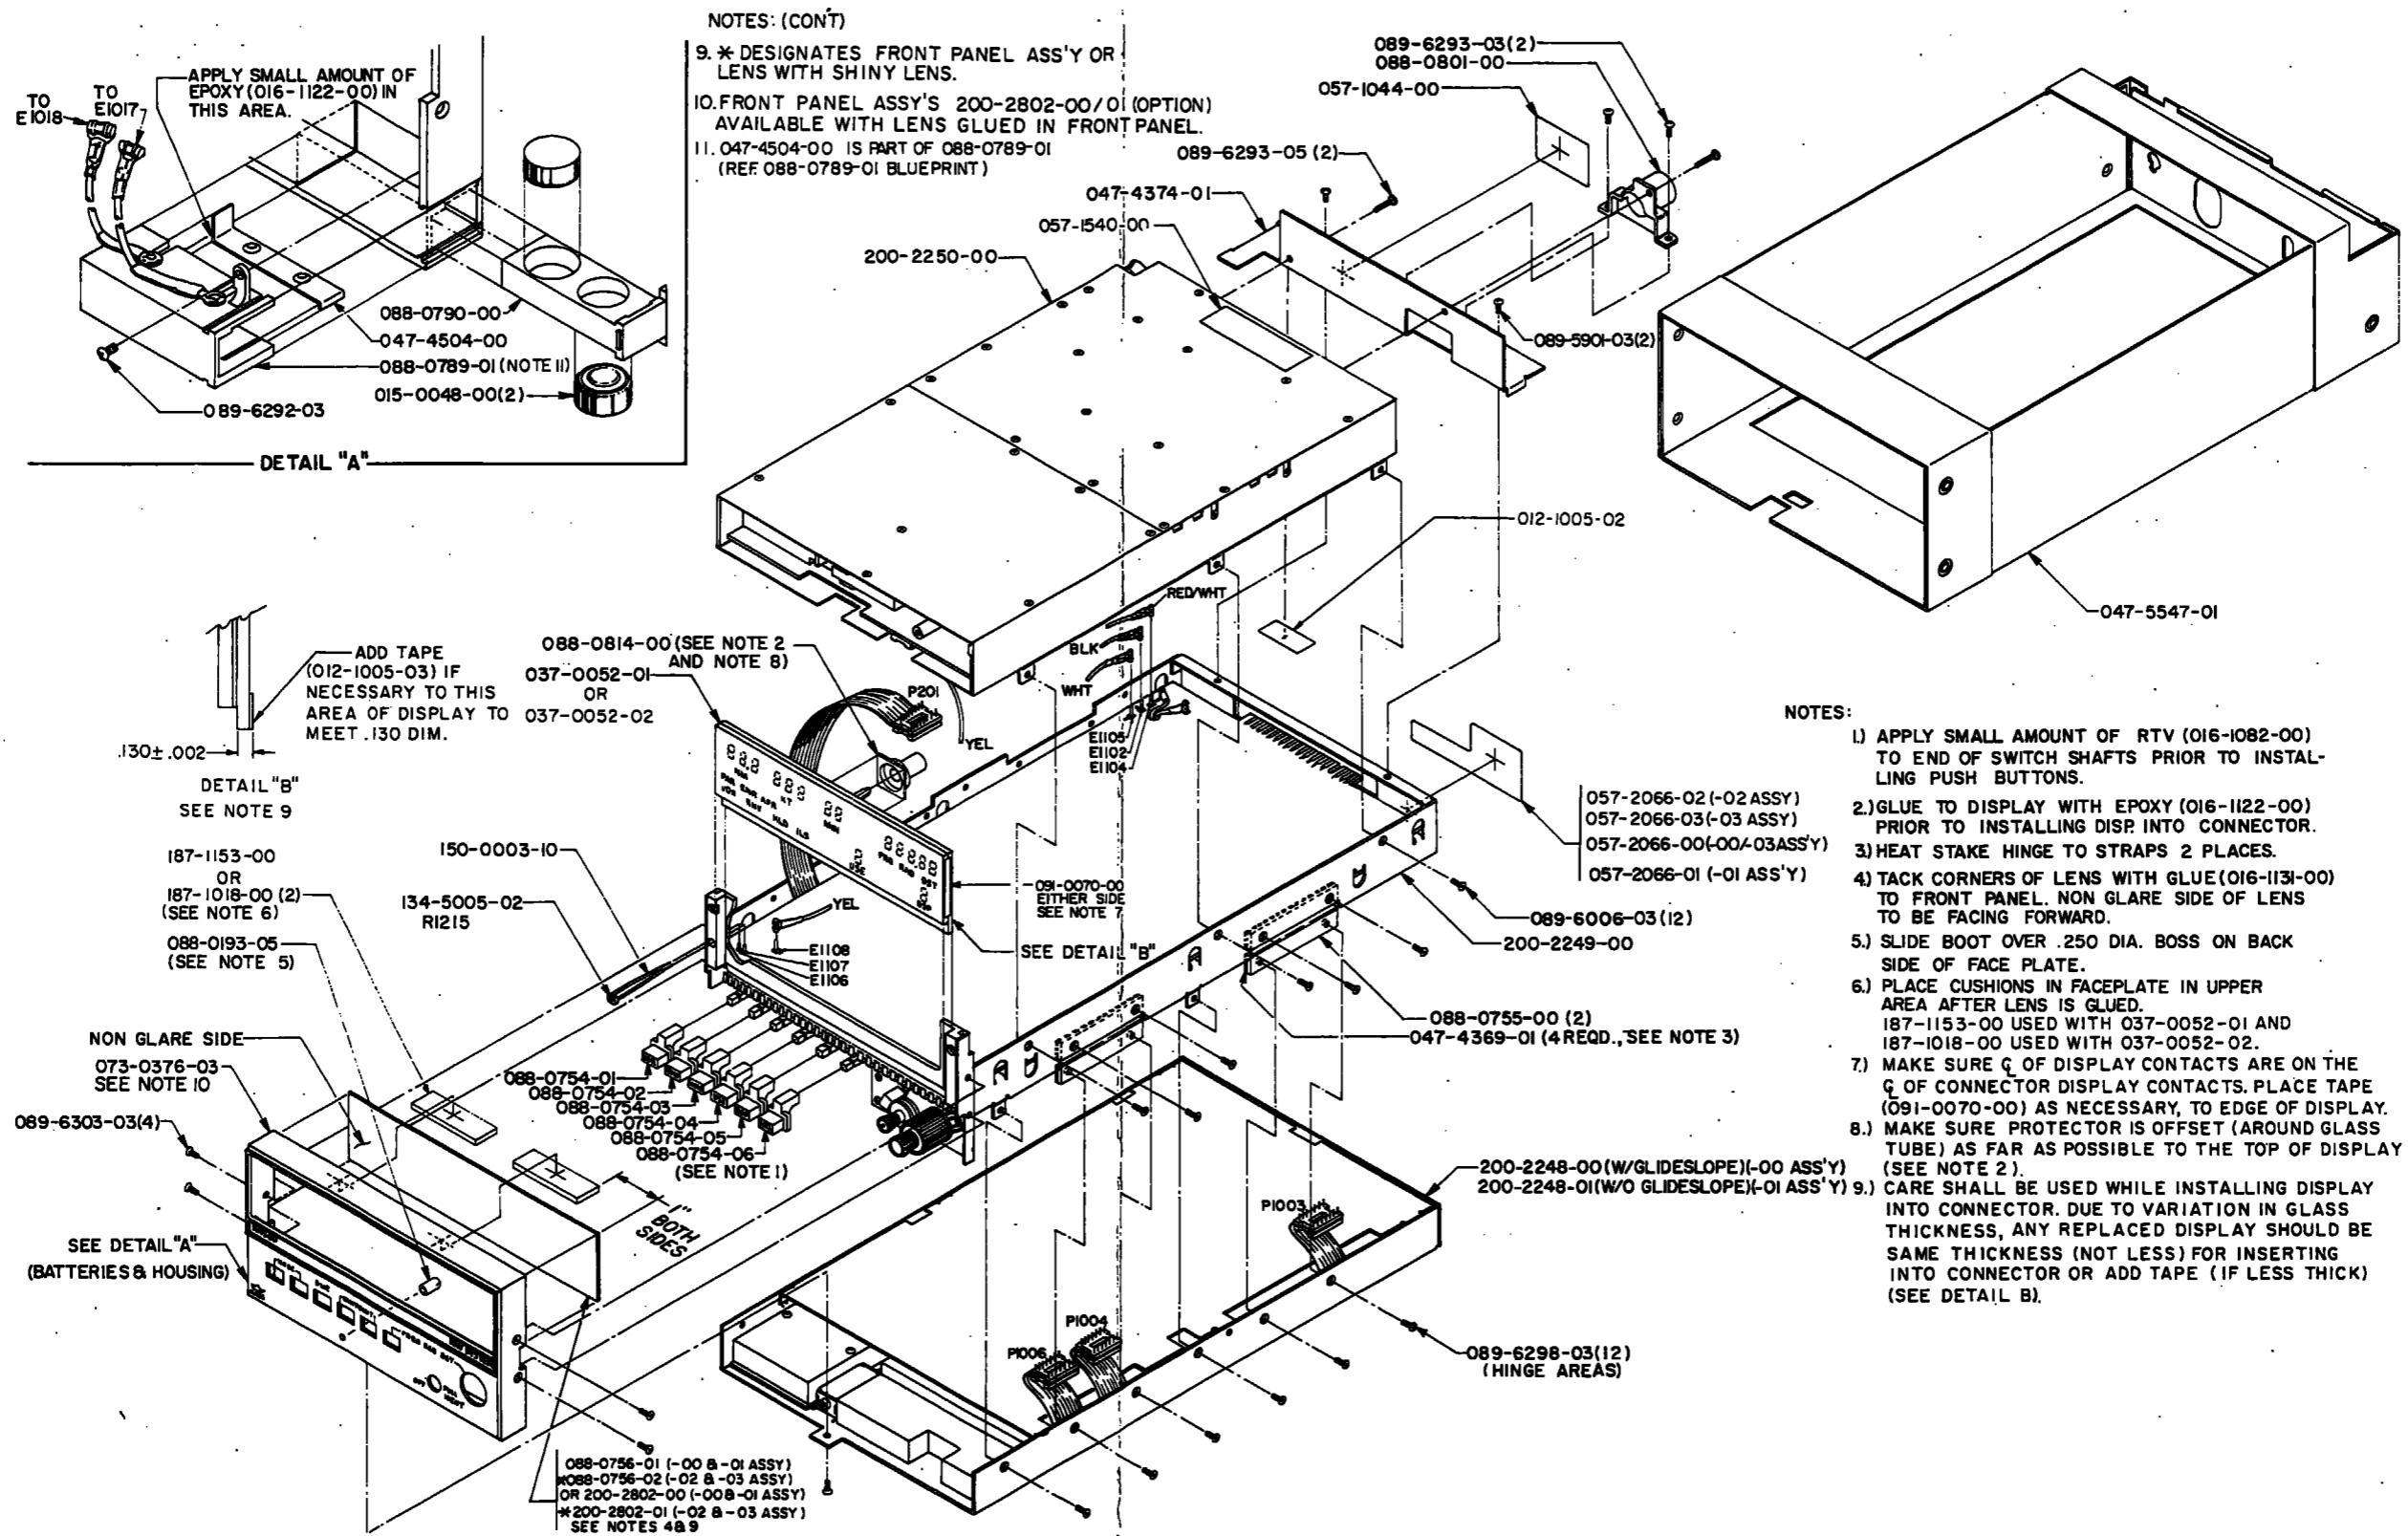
KNS 80 FINAL ASSEMBLY
